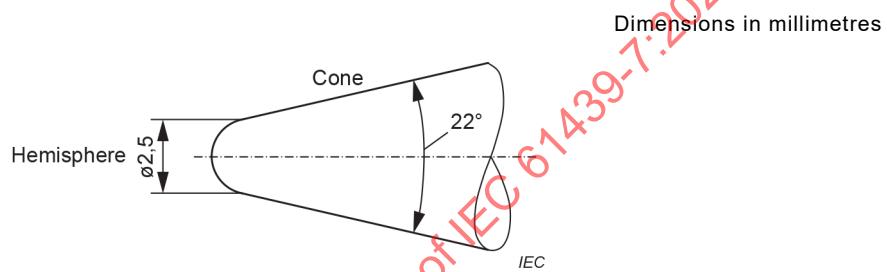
EE.1 – Striker element for test of resistance to mechanical shock impacts induced by sharp-edged objects
